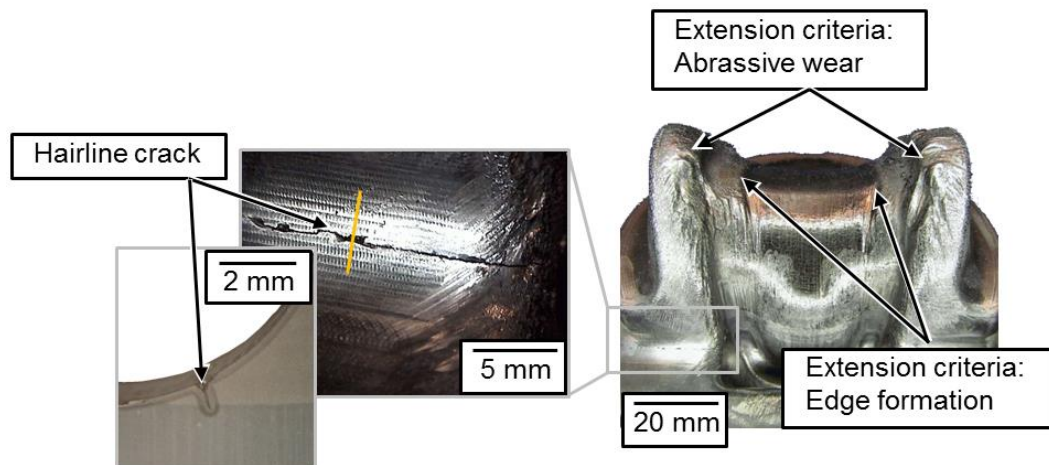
Analysis of the hairline crack after forging by an enlargement and a cross section.
